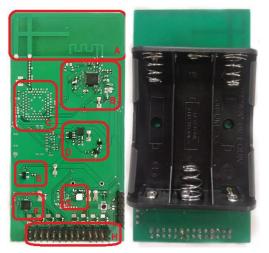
Main Board PCB top layer (a) and bottom layer (b).
